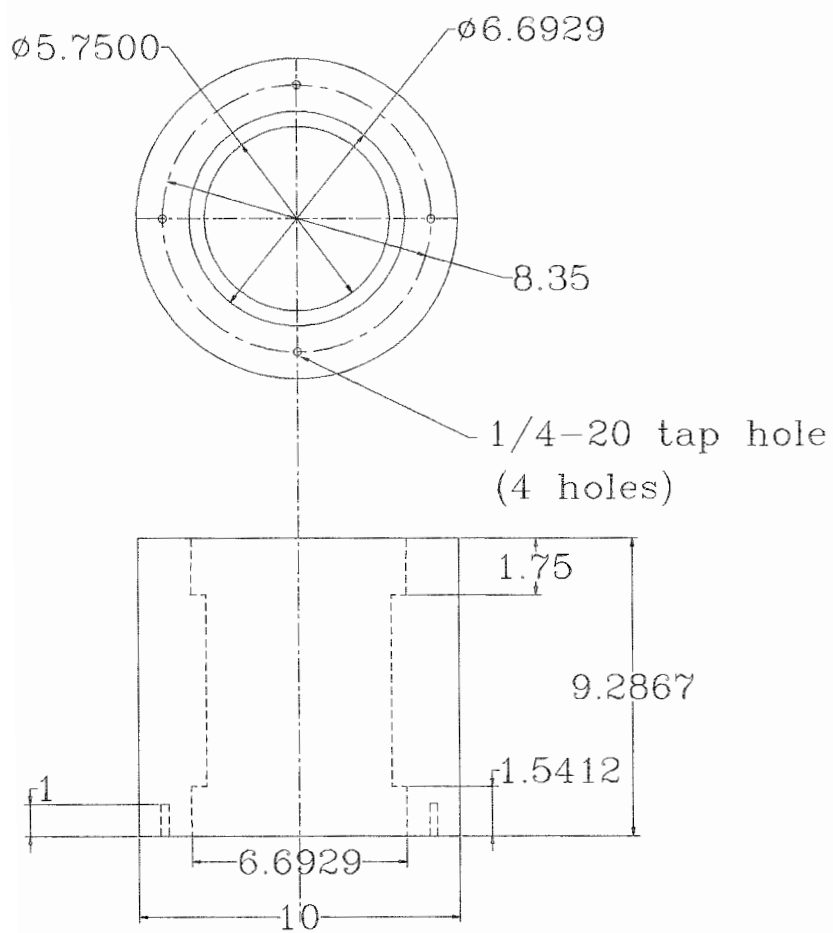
Part No. 8 Base Bearing Holding Cylinder
